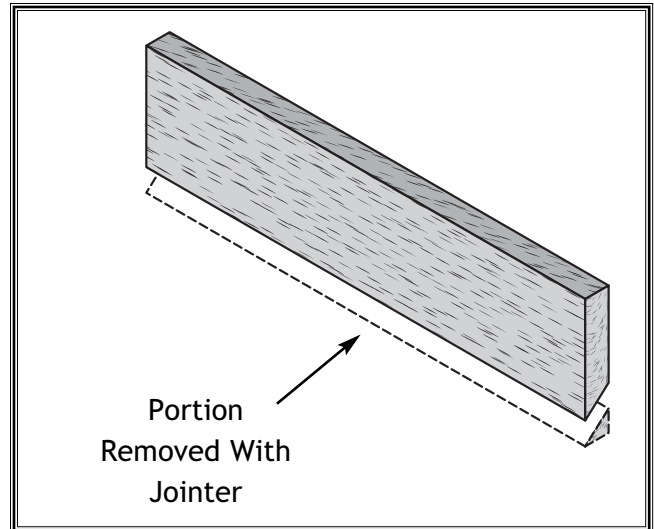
Bevel cutting produces an angled edge on the workpiece.
